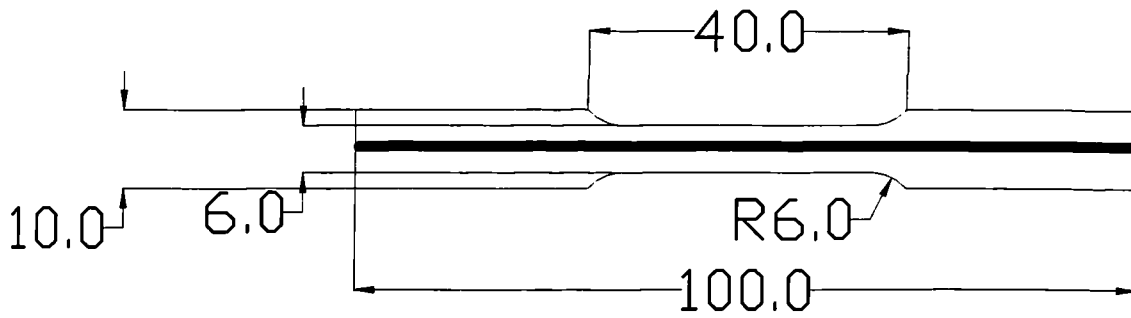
Schematic drawing and dimensions (in mm) of tensile specimens in IMI 318 weldments (specimens 6301 to 6324) (not to scale)
